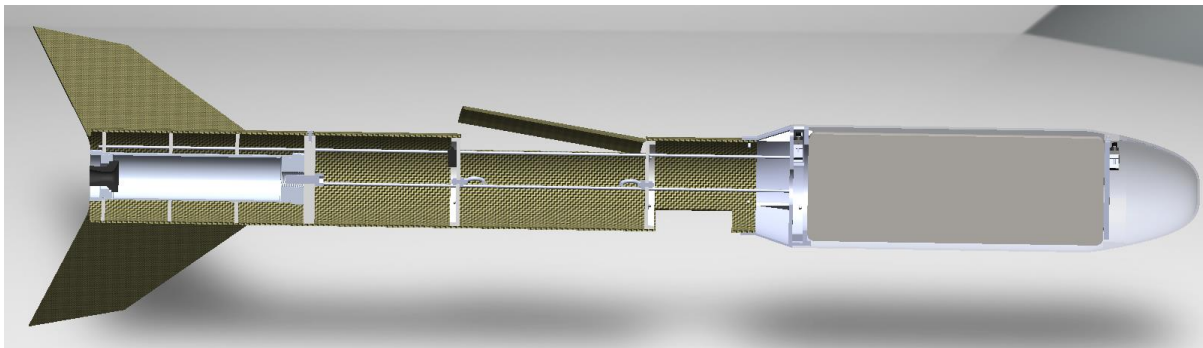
CROSS-SECTION VIEW OF OVERALL ASSEMBLY
